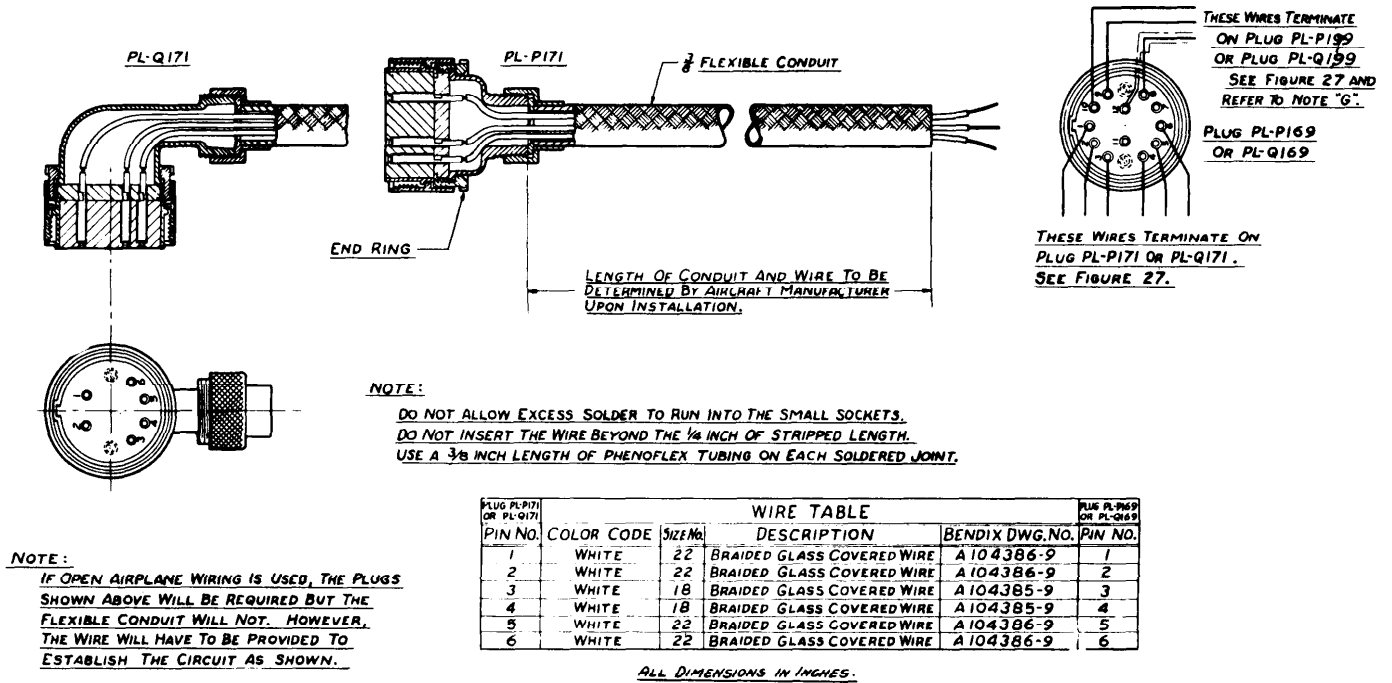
CABLE, DYNAMOTOR UNIT TO RACK, ASSEMBLY DRAWING
